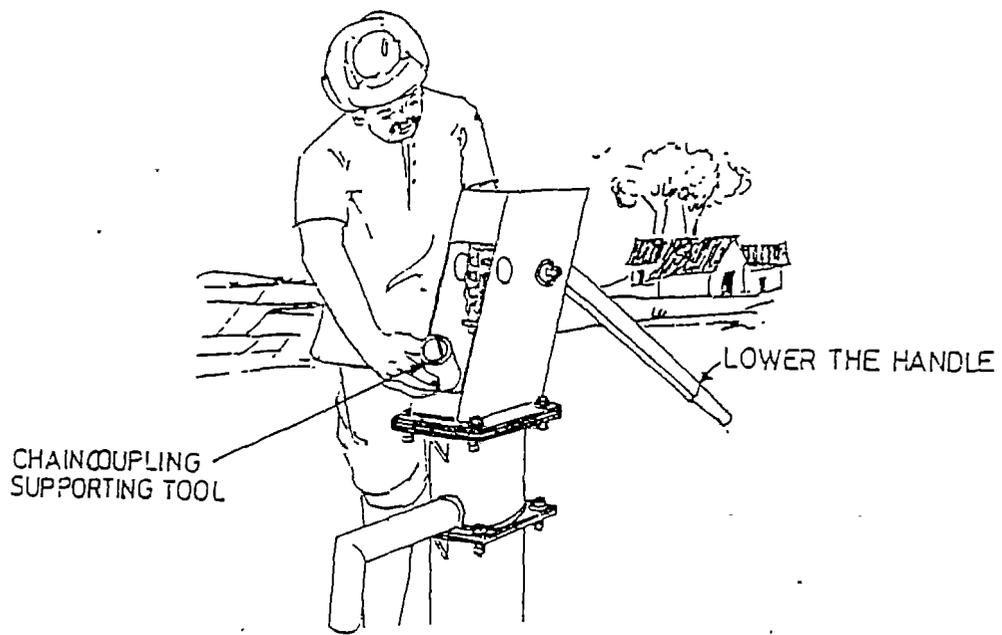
INSERT CHAIN COUPLING SUPPORTING TOOL
